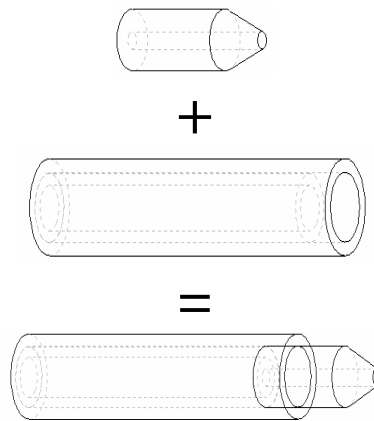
STEP 9—Wellbore Nozzle and Tube Adapter Assembly
